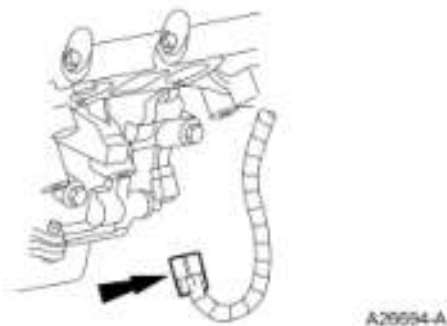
Disconnecting Crankshaft Position (CKP) Sensor Electrical Connector
